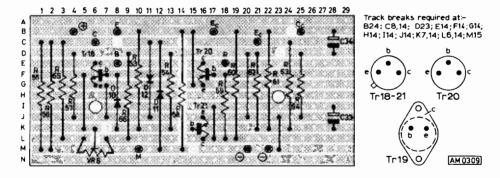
Component layout of the motor control board, shown here larger than actual size.
